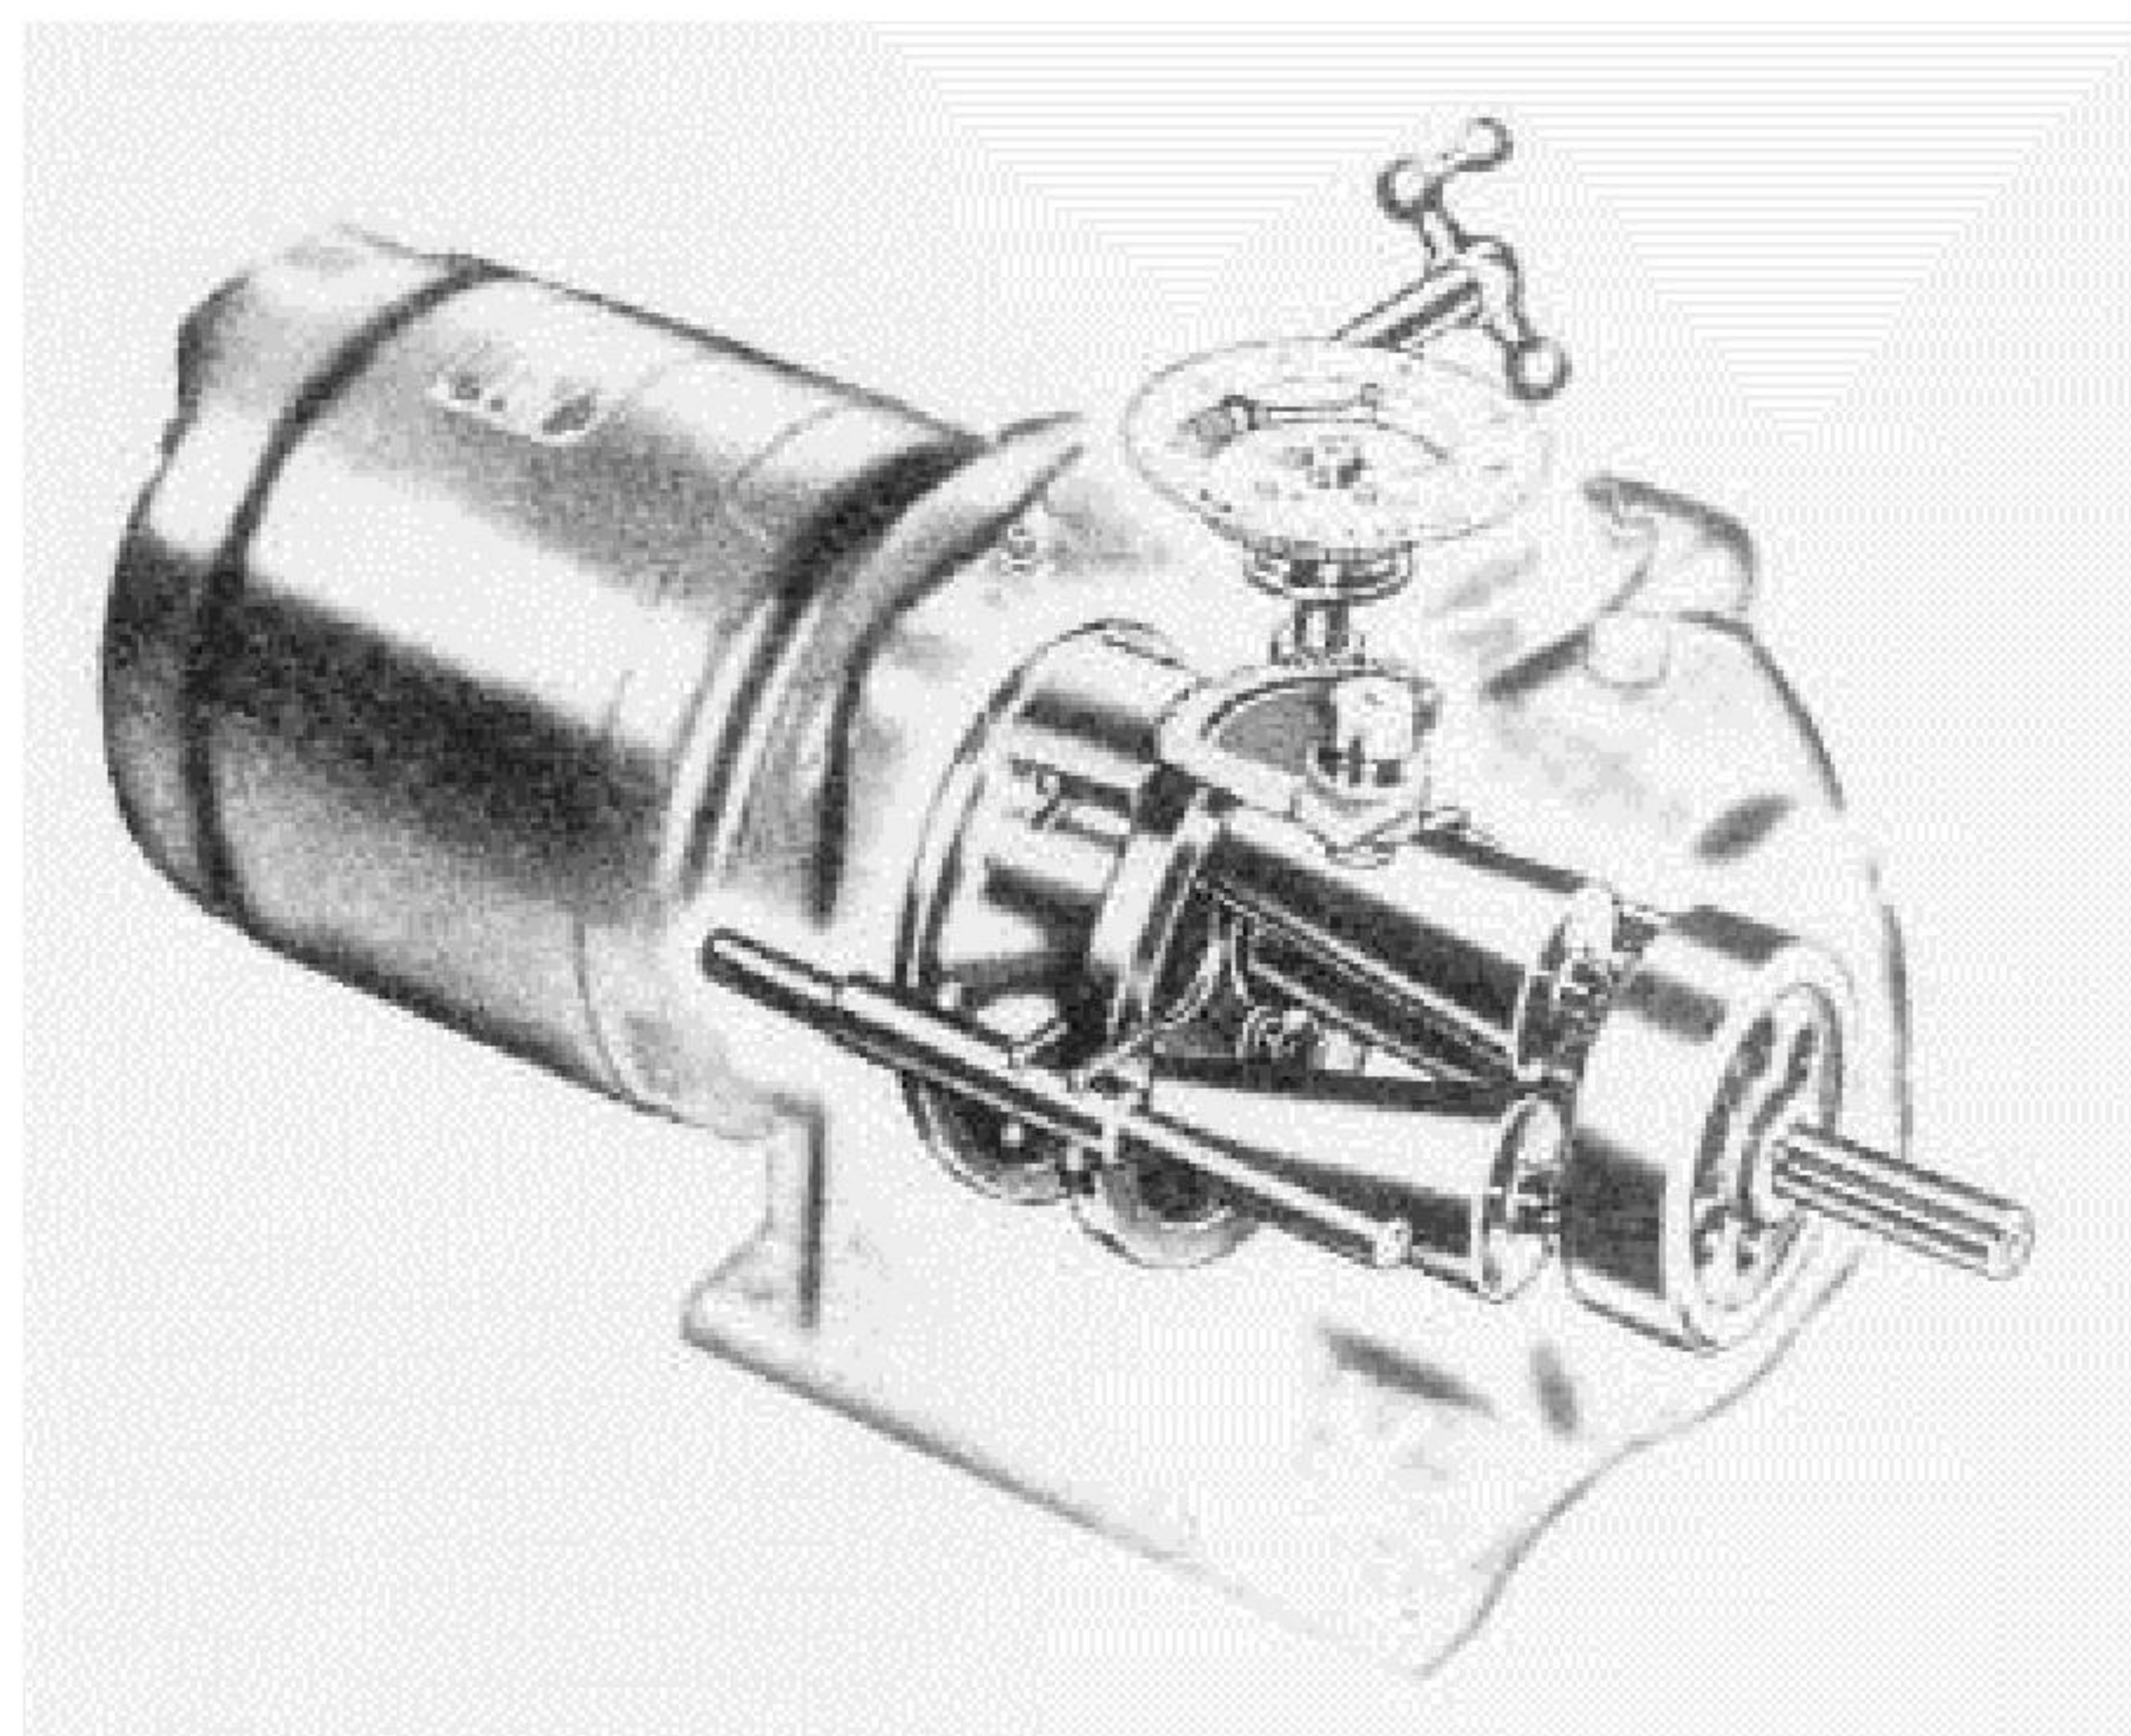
Drive with metal surfaces in frictional contact. (*Graham Transmission, Inc.*)
